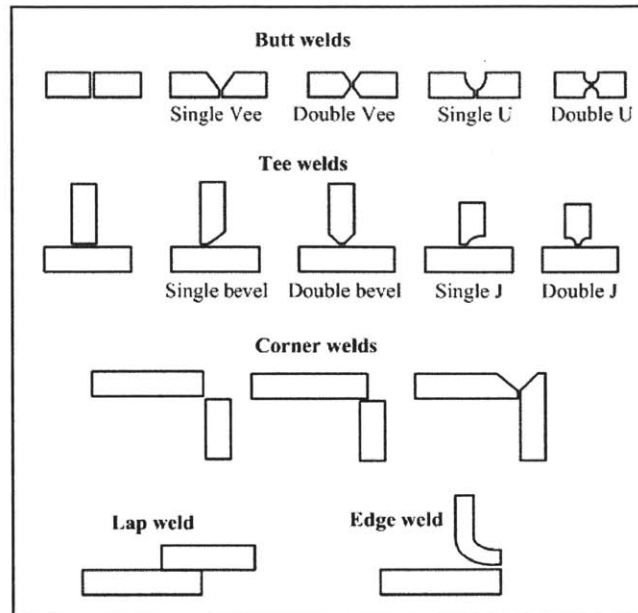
Weld Joints [Kopeliovich, 2012]
